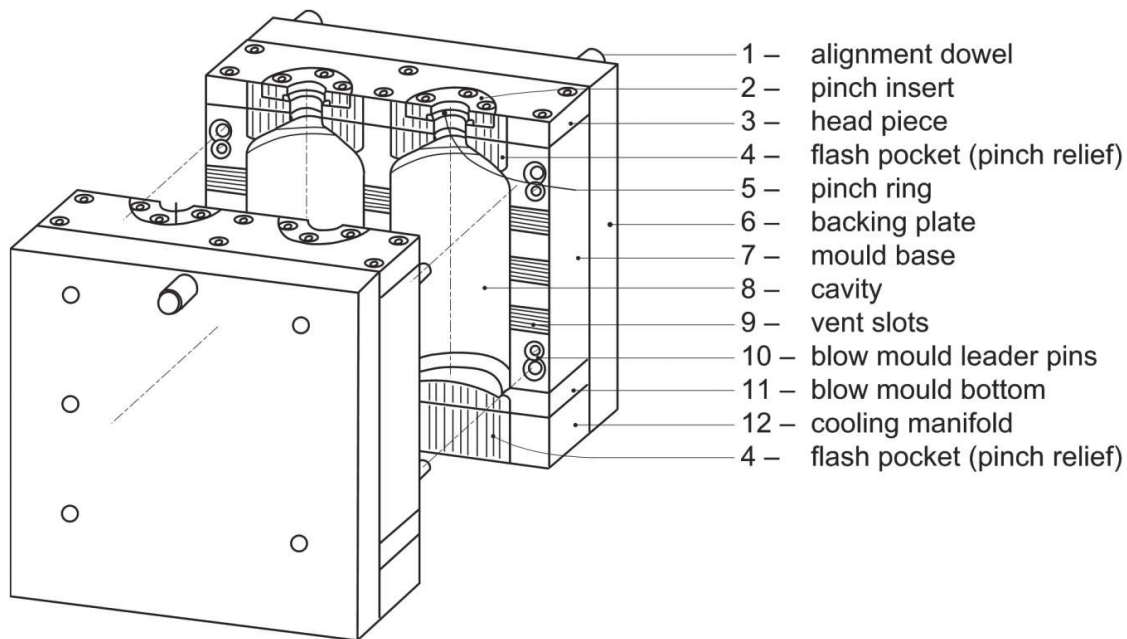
Scheme of an extrusion blow mould [1, 2]
